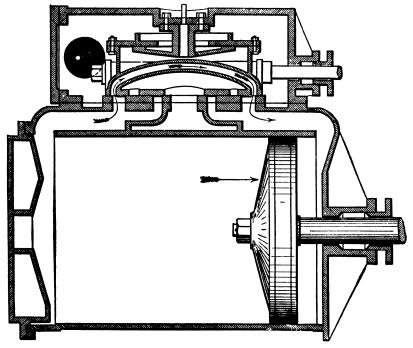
Cylinder, with Slide-Valve and Relief-Frame.
